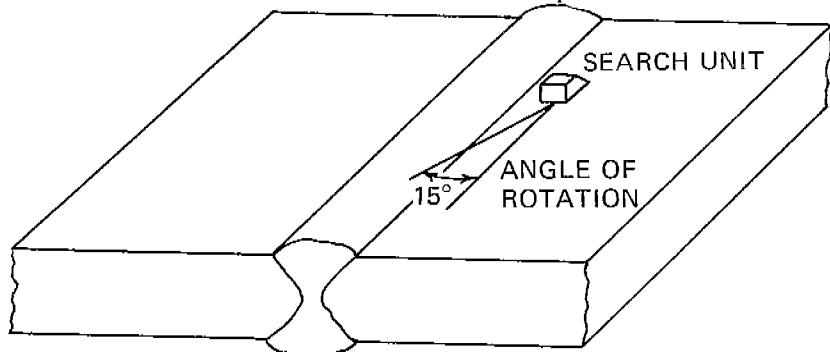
Supplementary Technique for Inspecting Butt Welds when the Weld Bead is not Ground Flush
